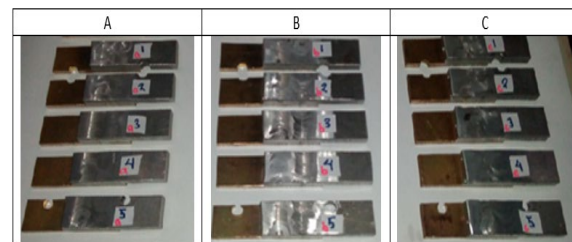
Specimens ready for shear tests A) 11 mm pin length, B) 11.5 mm pin length, and C) 12 mm pin length
